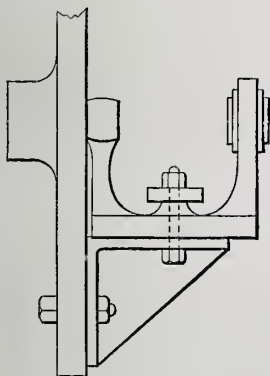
Angle-Plate Attached to Face-Plate, with Headstock in Position.
